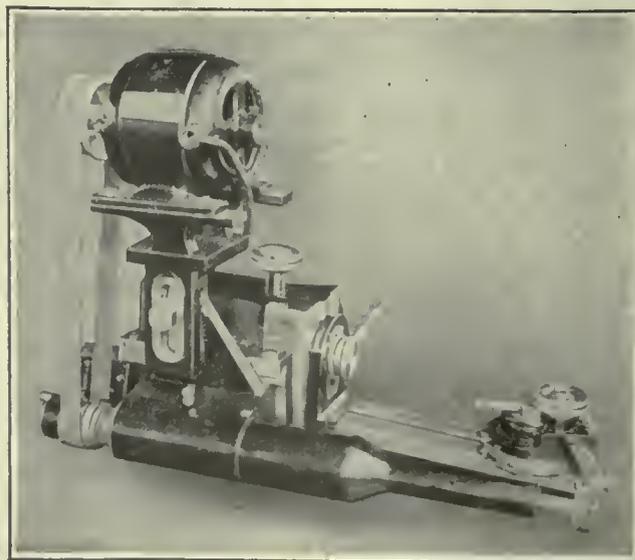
LAFAYETTE UNIVERSAL GRINDER EQUIPPED FOR HANDLING INTERNAL WORK.
